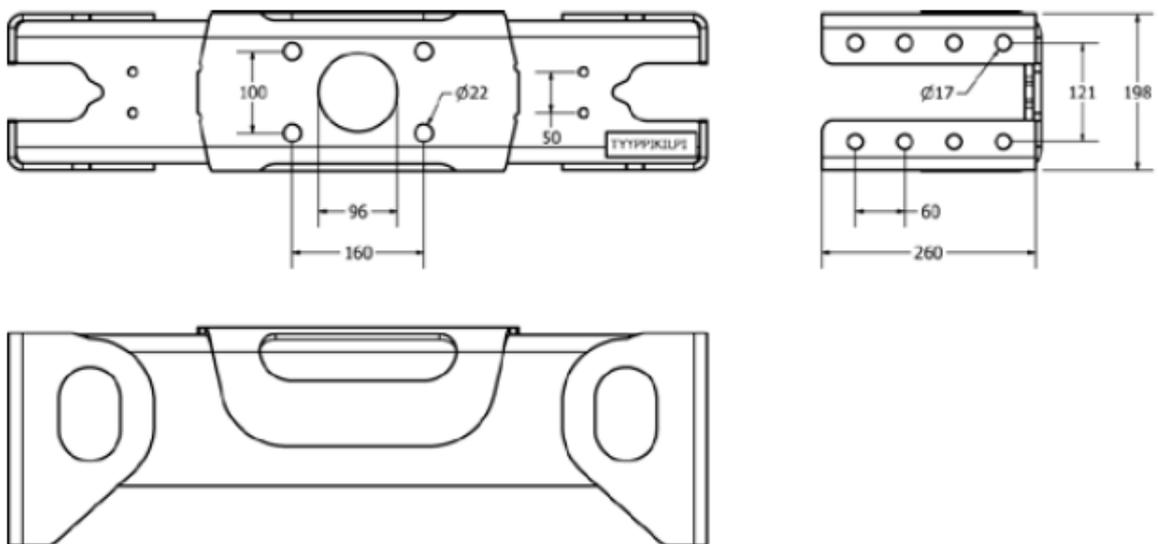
Dimensional drawing of the current draw beam (M. Korte Oy 2018, p. 17).
